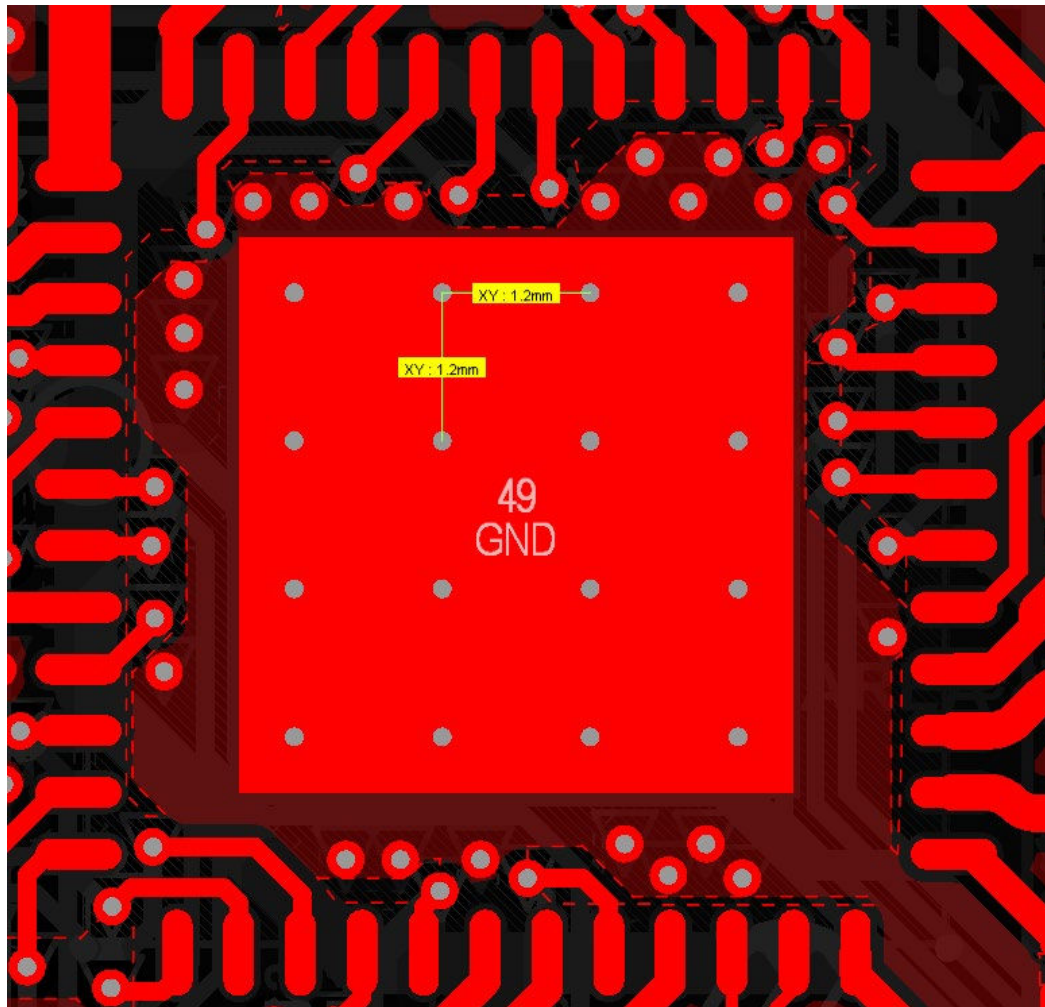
Bottom Layer Overlaid with Top Assembly
